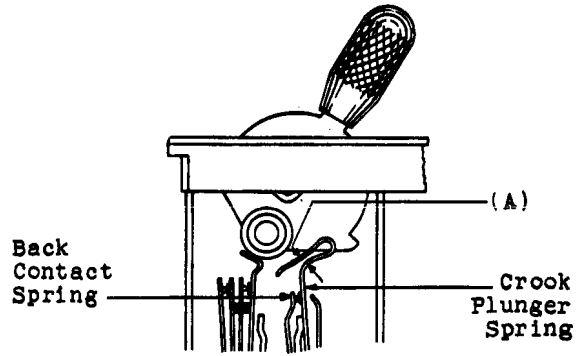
Illustrating Relation of Plunger Springs to Roller and Cam
